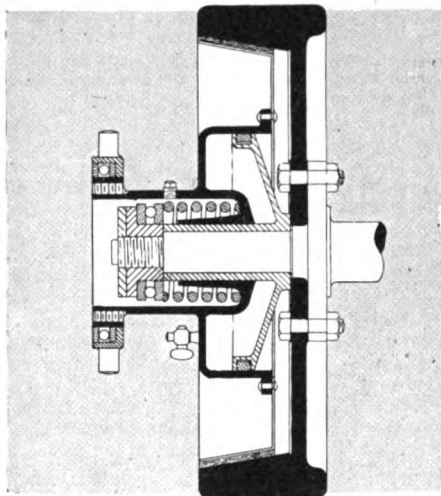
Pneumatic safety clutch that cannot be made to grab
